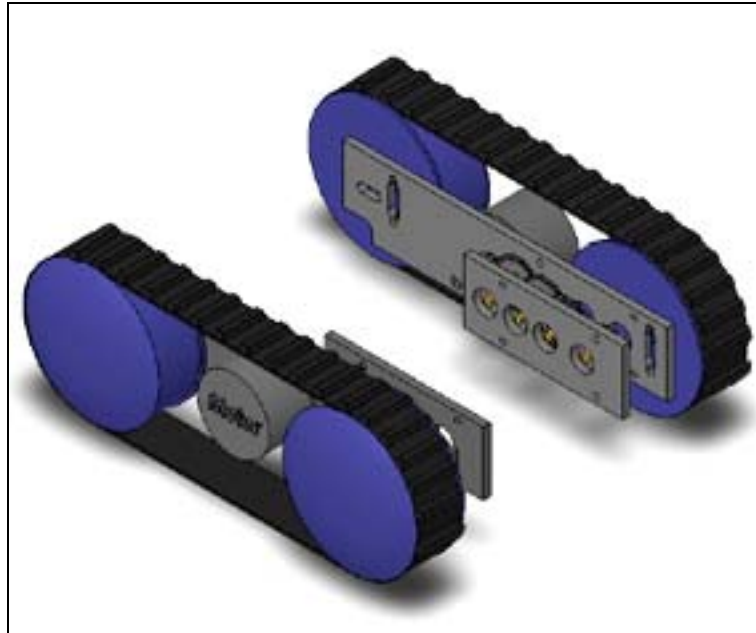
Motor is connected to the back wheel with a two speed gearbox
